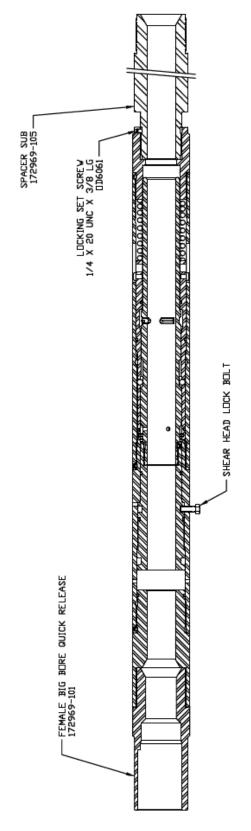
LATCH ASSEMBLY FINAL ASSEMBLY
